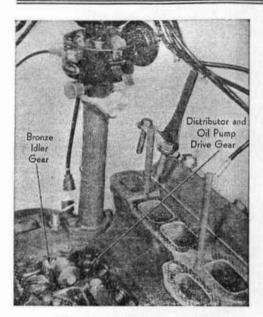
Distributor and oil pump drive, 1940-48 V8
